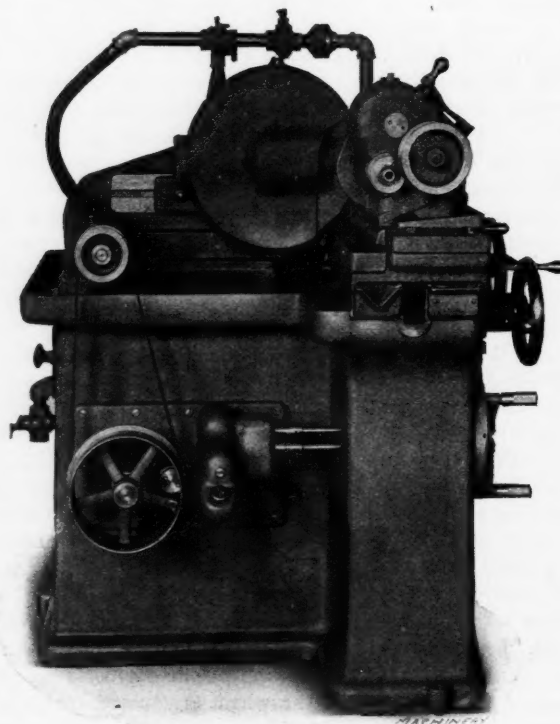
End View of Fitchburg Style A Plain Grinding Machine
